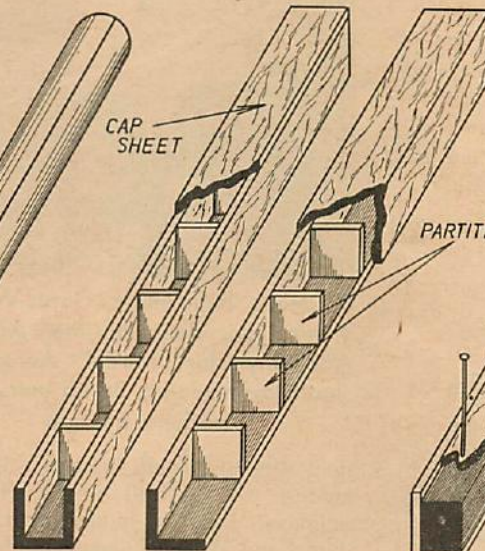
BUILT UP STICKS CAN BE MADE BY USING U AND L BEAMS- PARTITIONS ARE CEMENTED IN- U BEAM IS CAPPED WITH SHEET BALSA
